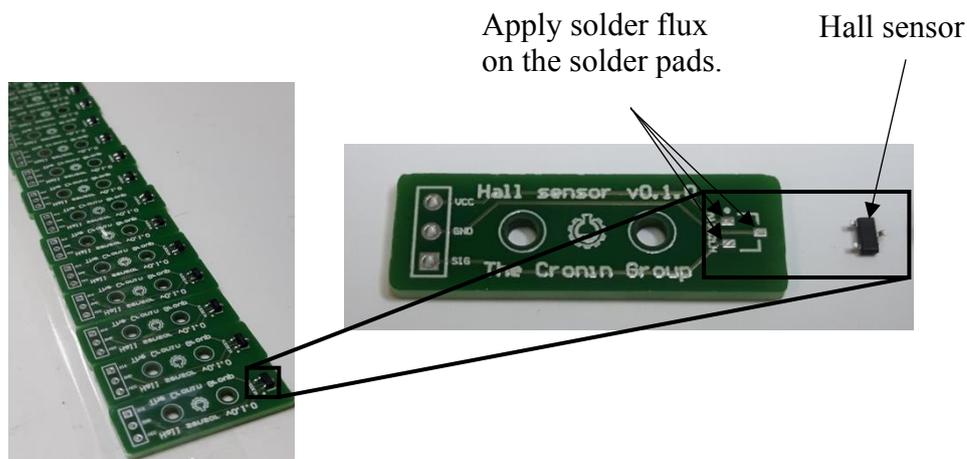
Soldering of the Hall sensors onto the Hall sensor boards.
